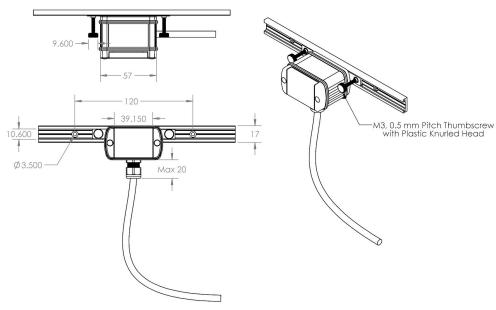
16mm Sensor Head Assembly Dimensions (All Dimensions are in mm)
